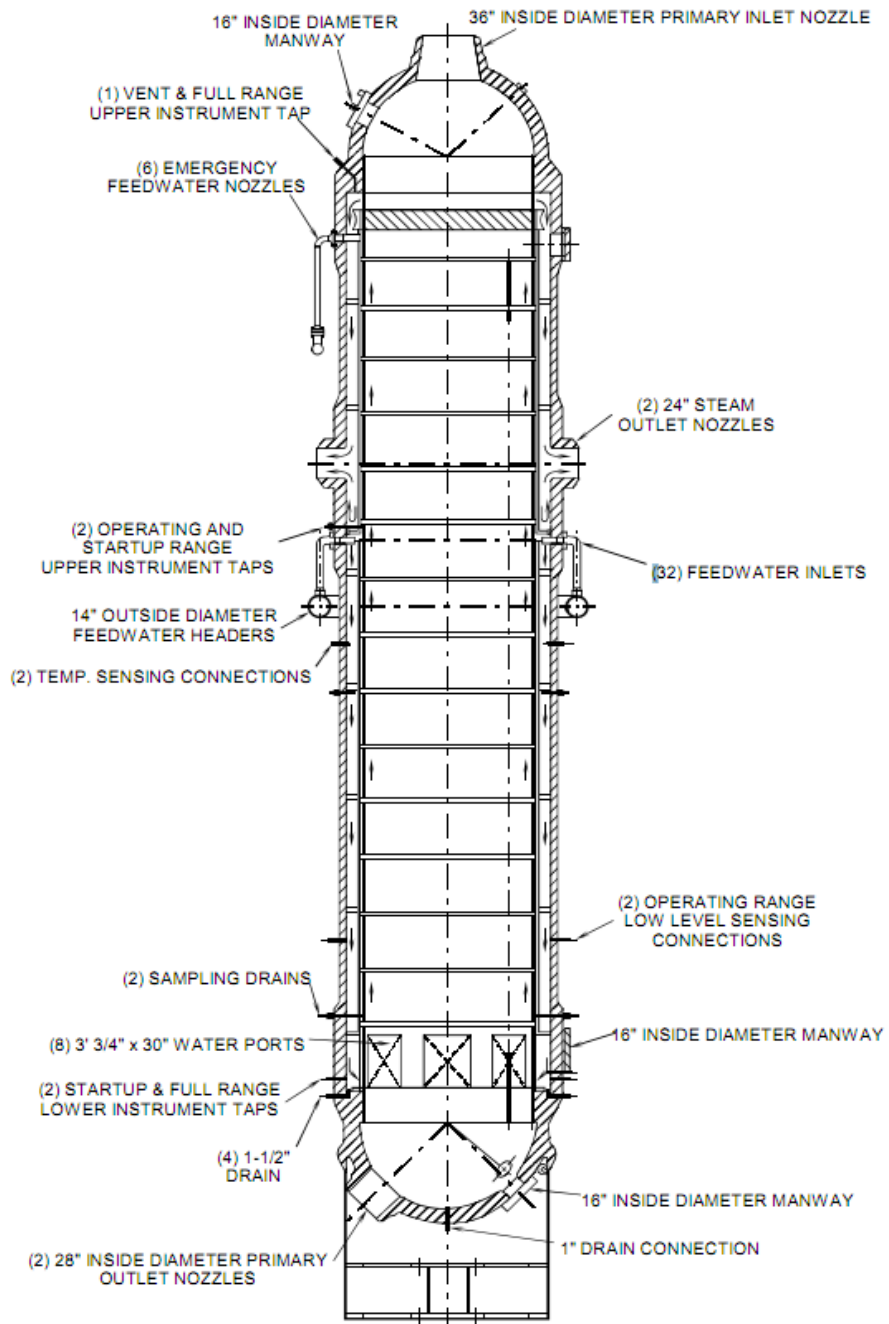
Cutaway view of a Babcock & Wilcox once-through steam generator [25]
